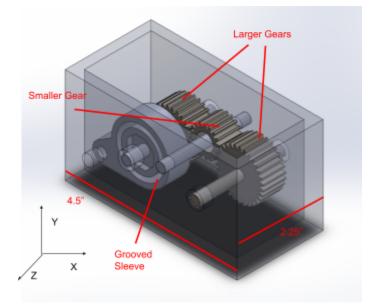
Model of Final Transfer Case Assembly (Czuba et al., 2021).
